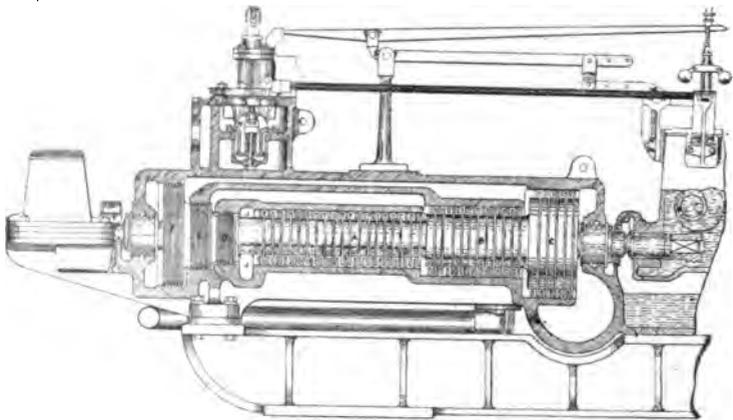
SECTIONAL VIEW OF PARSONS' STEAM TURBINE.
